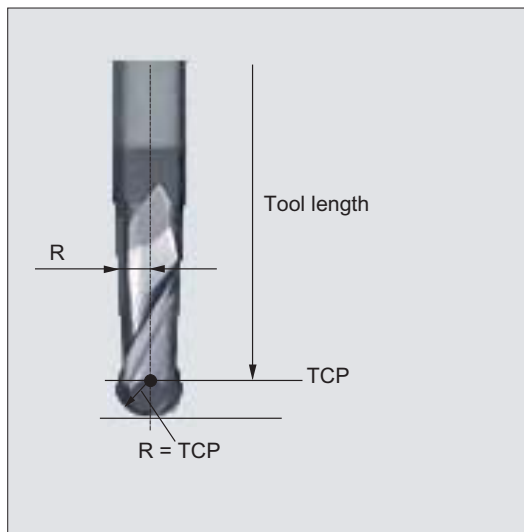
The length up to the TCP (Tool Center Point) must be entered as tool length of the radial cutter.
